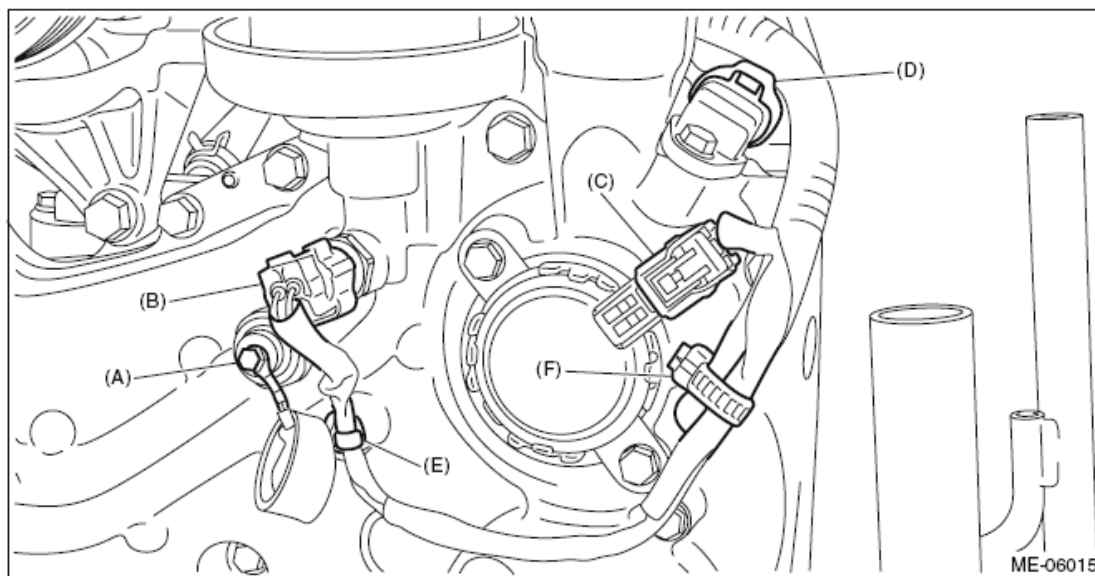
Identifying Engine Oil Temperature Sensor, Connector, Terminal And Clip
